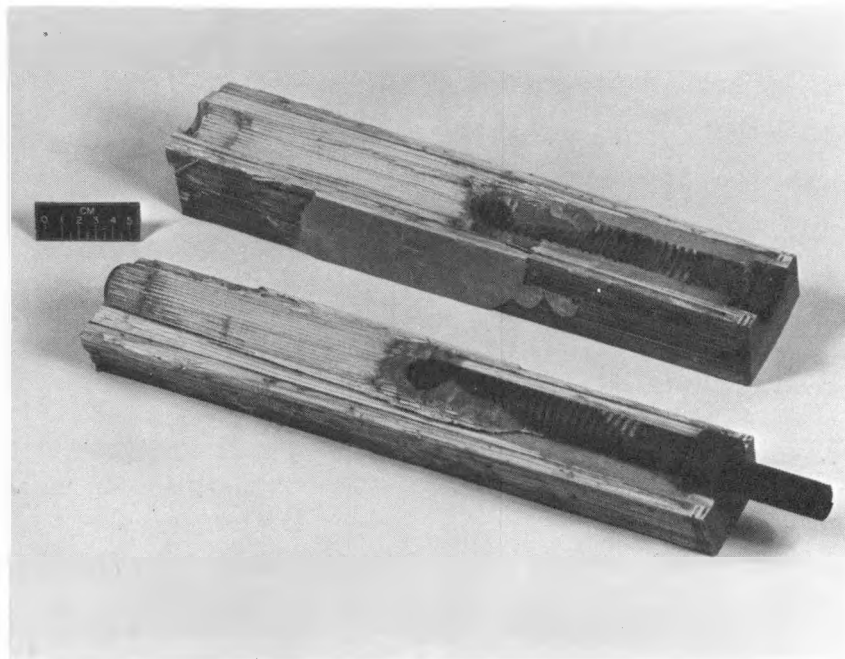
Stud removed from root end of 20 foot section after test - wood and epoxy cut and pryed open for examination.
